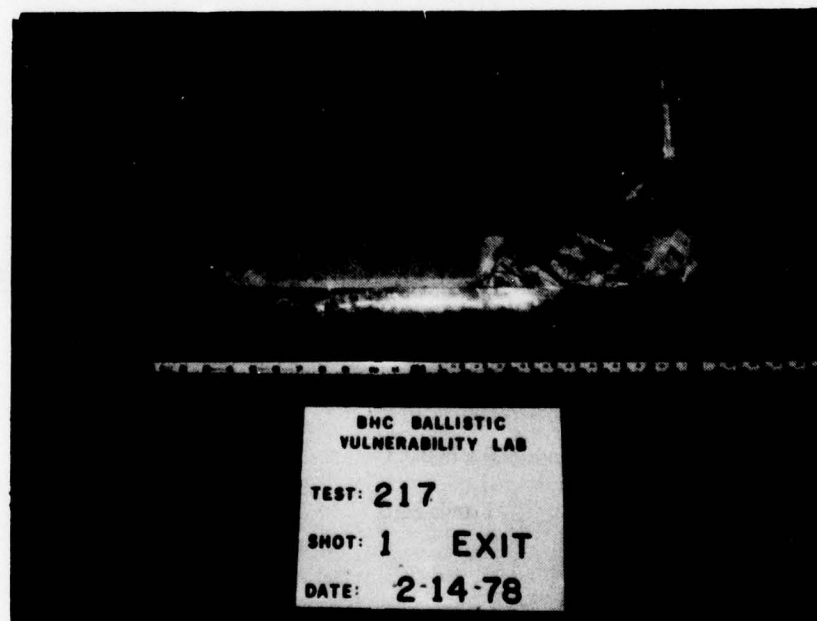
Top view of the OH-58C composite main rotor blade test specimen showing projectile exit.
